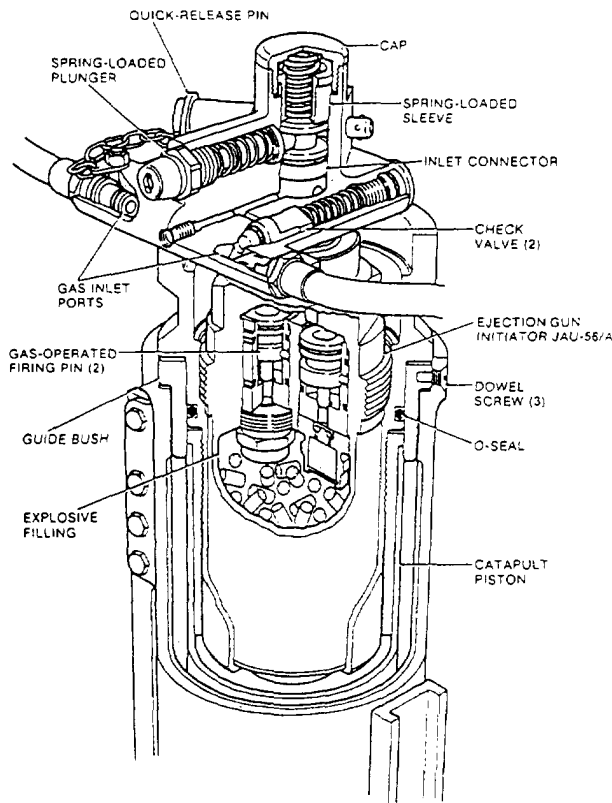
Ejection gun initiator (JAU-56/A) and catapult manifold valve.
